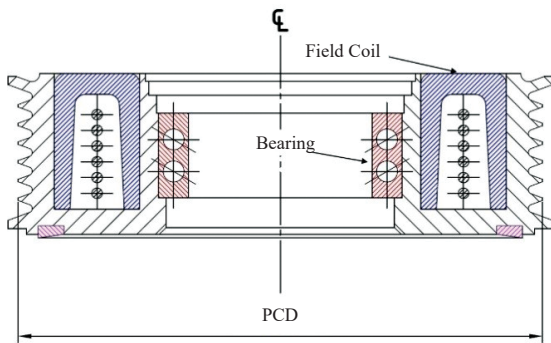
Schematic of assembly pulley with the standard parts and the common customize dimensions.
